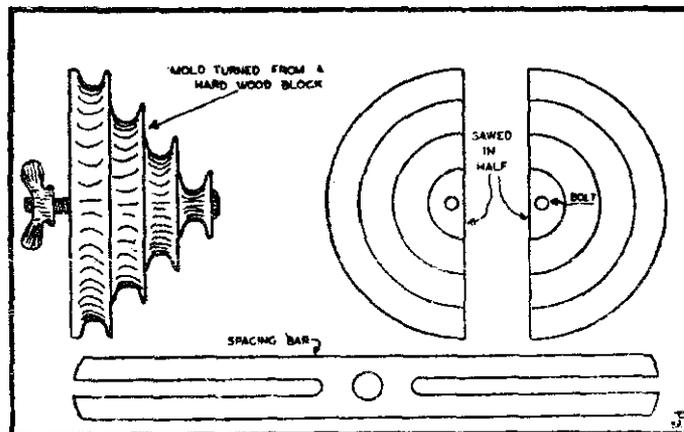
The details of the molds used with the winding machine of Fig. 3 are shown above
